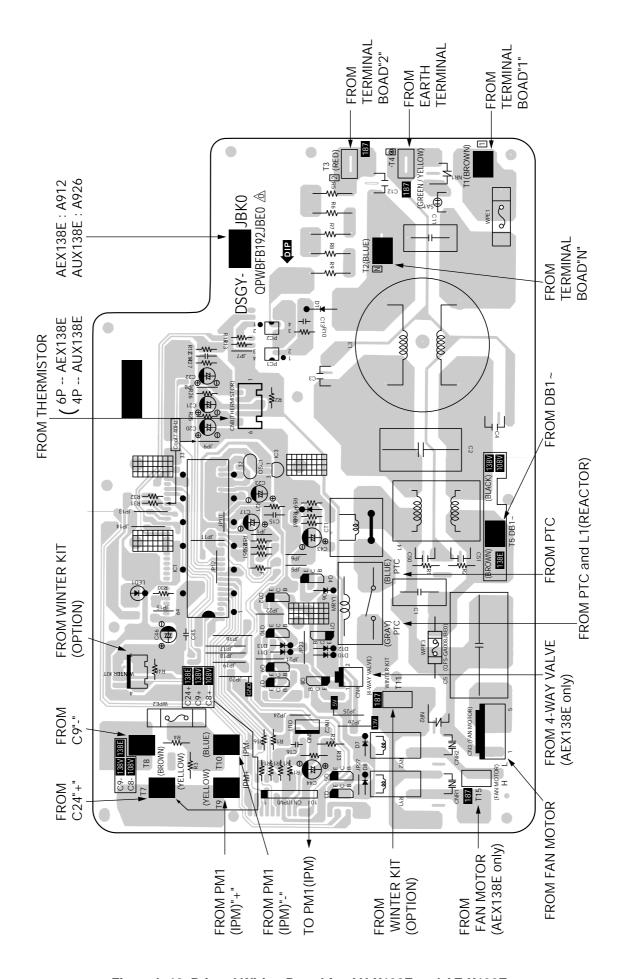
Printed Wiring Board for AU-X138E and AE-X138E
